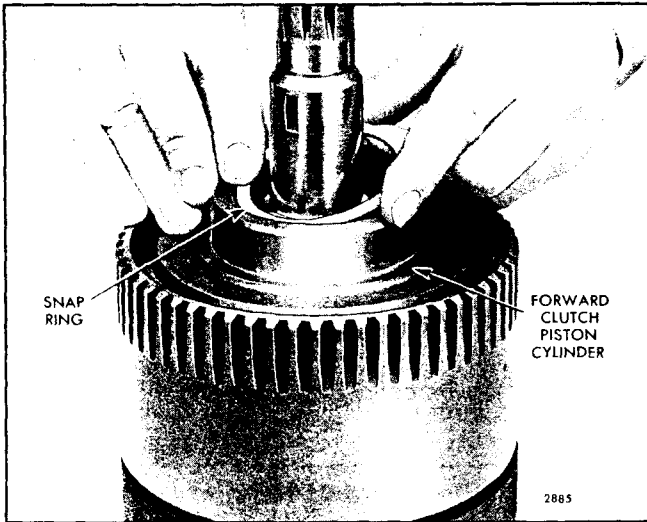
Installing Bearing Retaining Snap Ring in Forward Clutch Piston Cylinder
